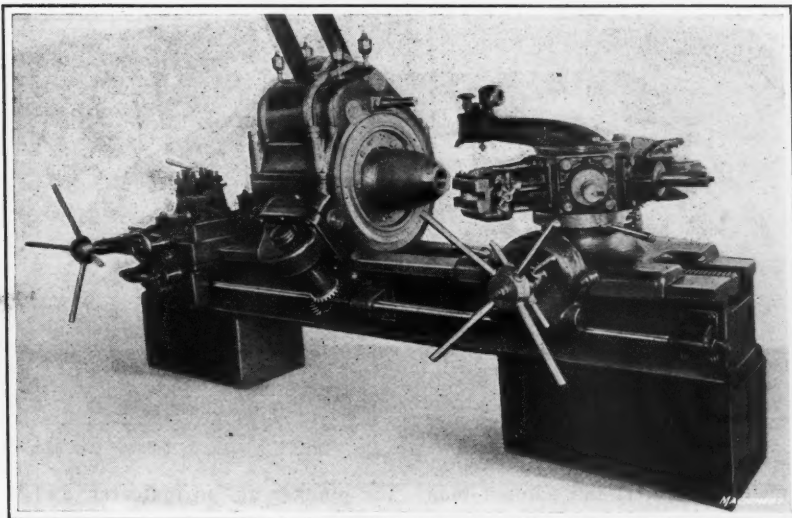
Franco Tosi Shell Lathe, showing Turret carrying Tools for Working on Nose of Shell
